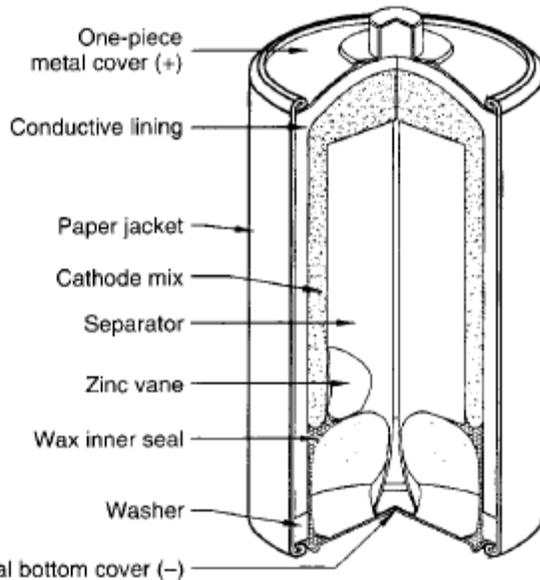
Typical cutaway view of cylindrical Leclanche ‘ battery (“Eveready”) inside-out construction.
